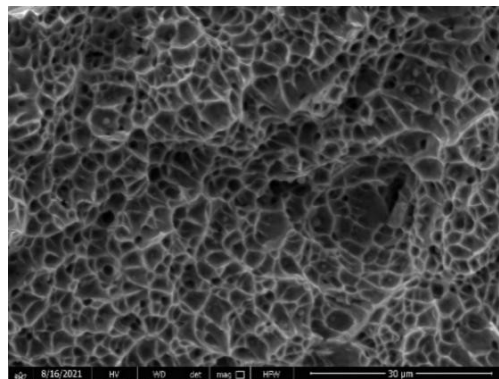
Impact fracture morphology of the welded joint 2 #
